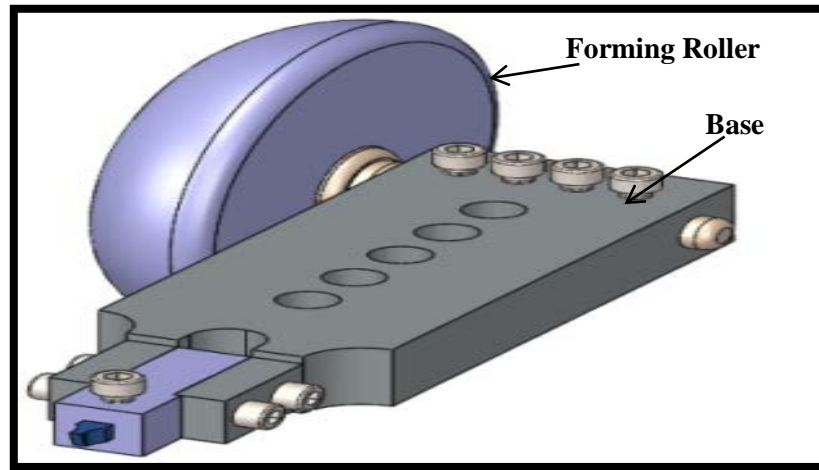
Represented the Assembled the Roller with Shaft with the Base
